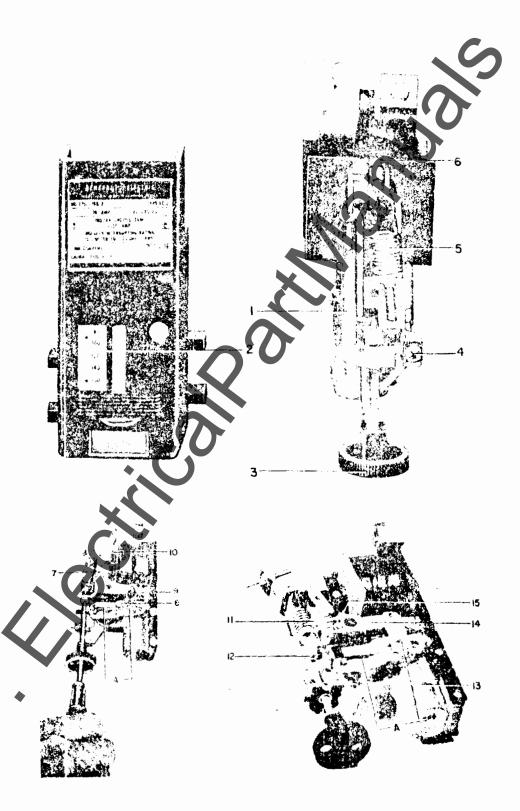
(8024843, 801449, 8019485) Overcurrent tripping device - EC-2
